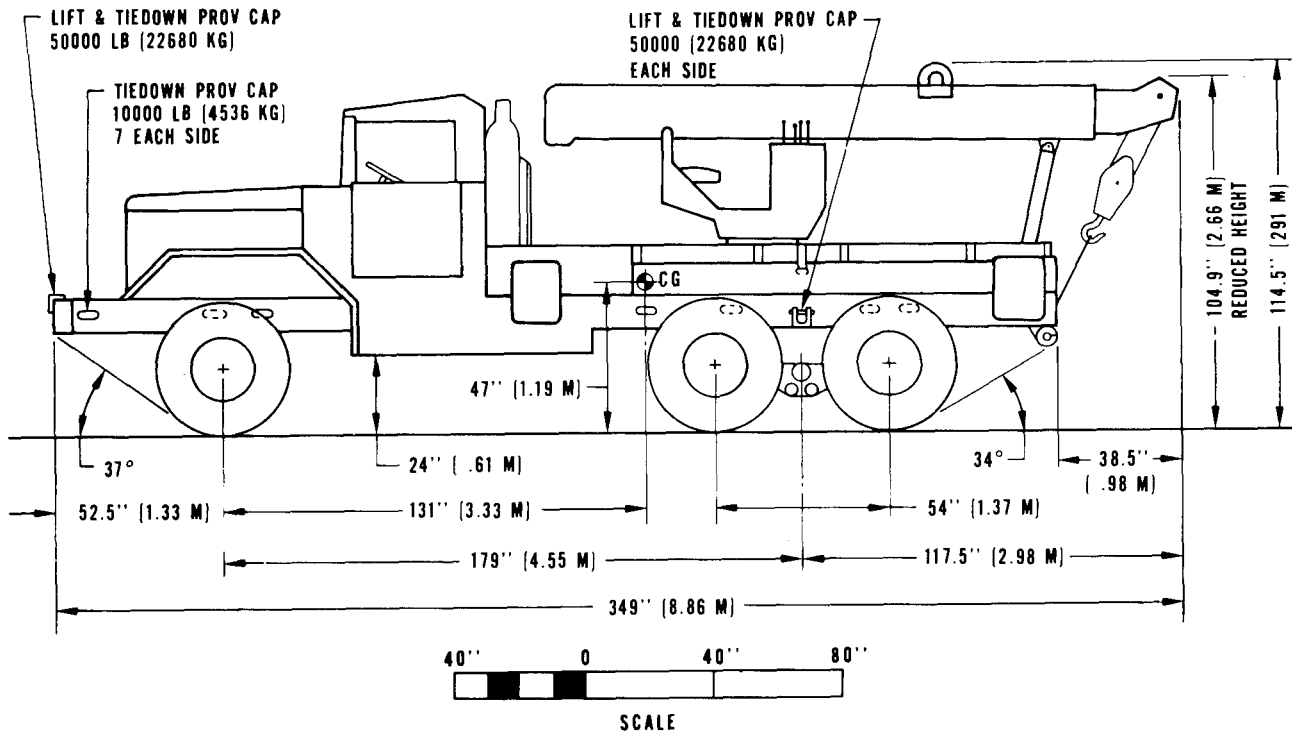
Side elevation, truck, wrecker, WWN, M543.
